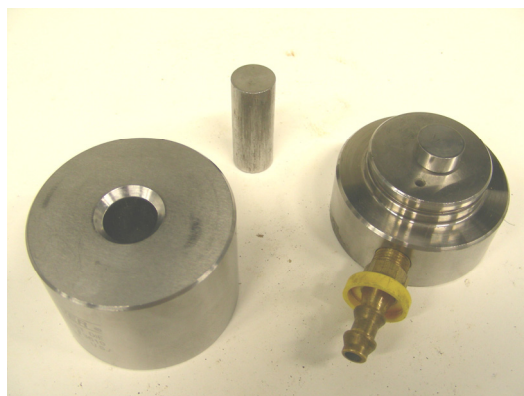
A 13 mm I.D. Cylindrical Stainless Steel Mold
